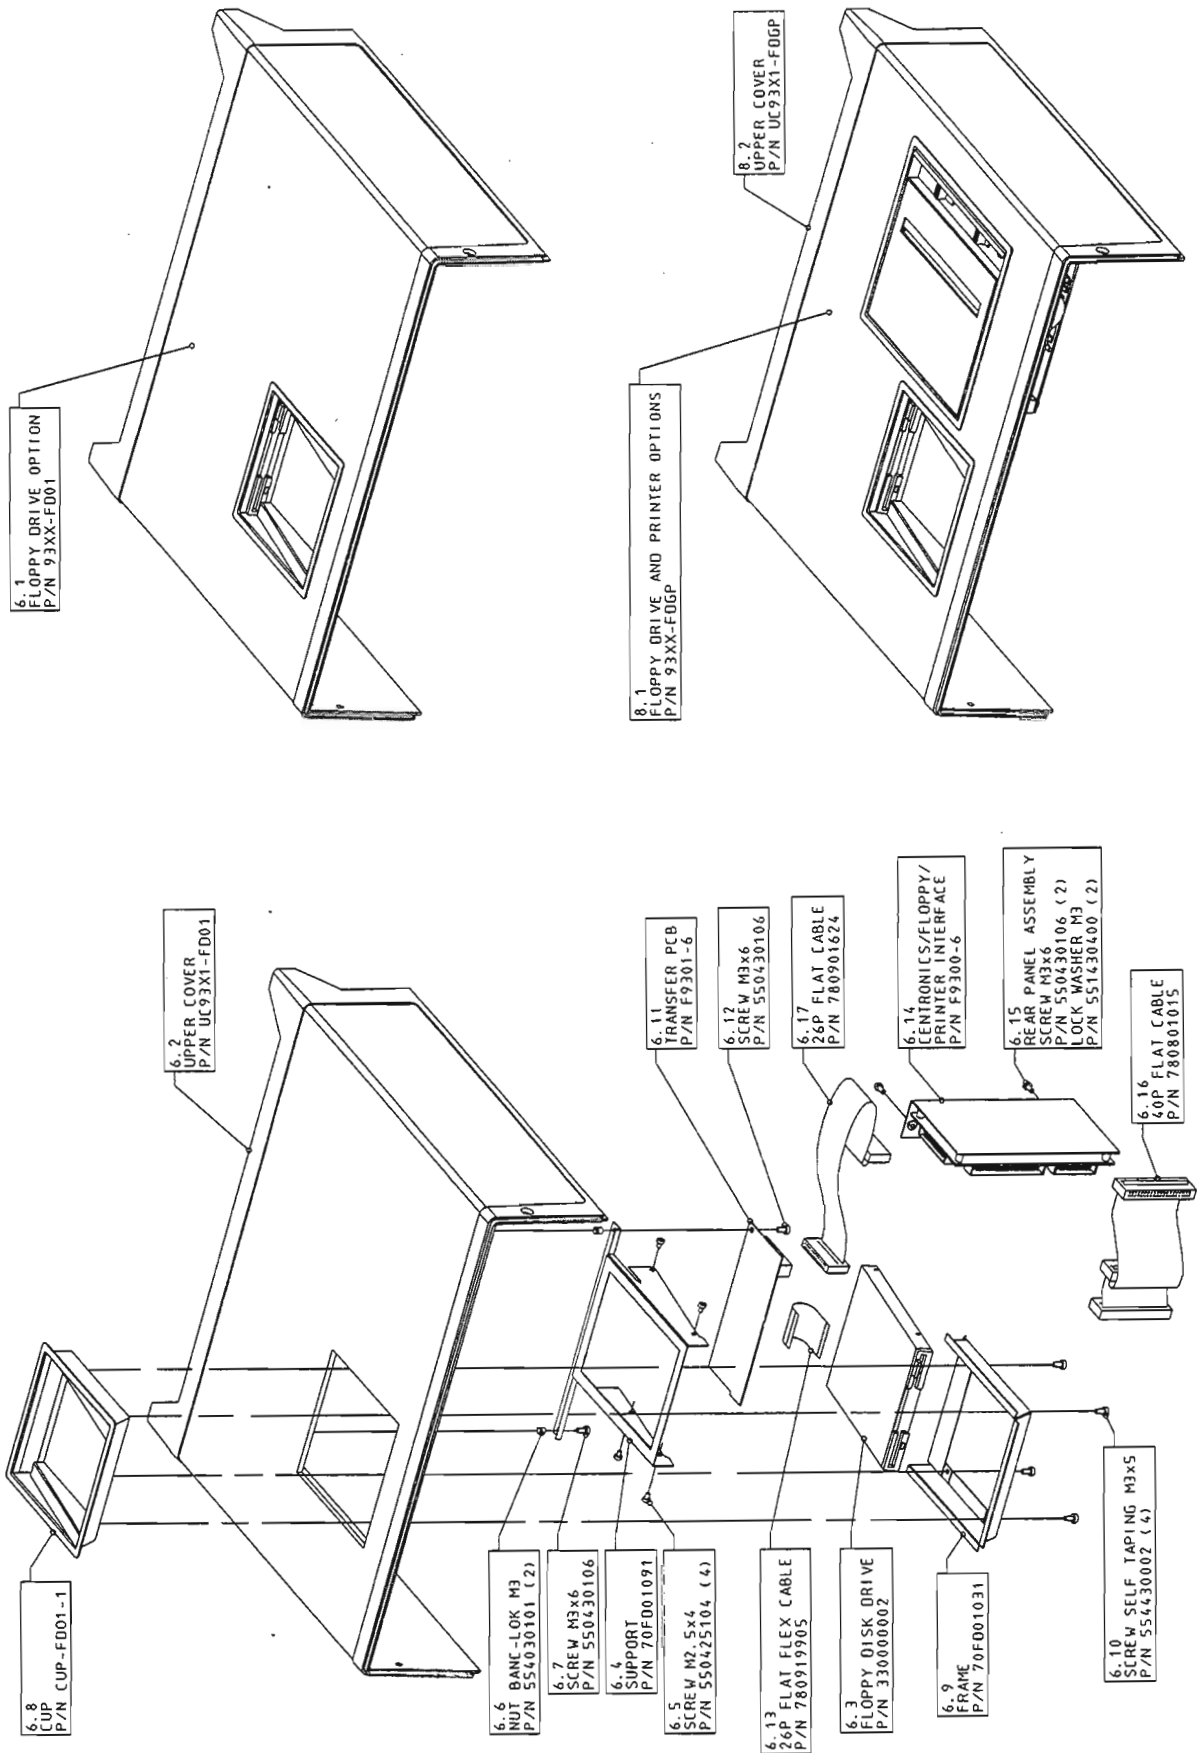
Floppy Drive Assembly P/N: 330000002
